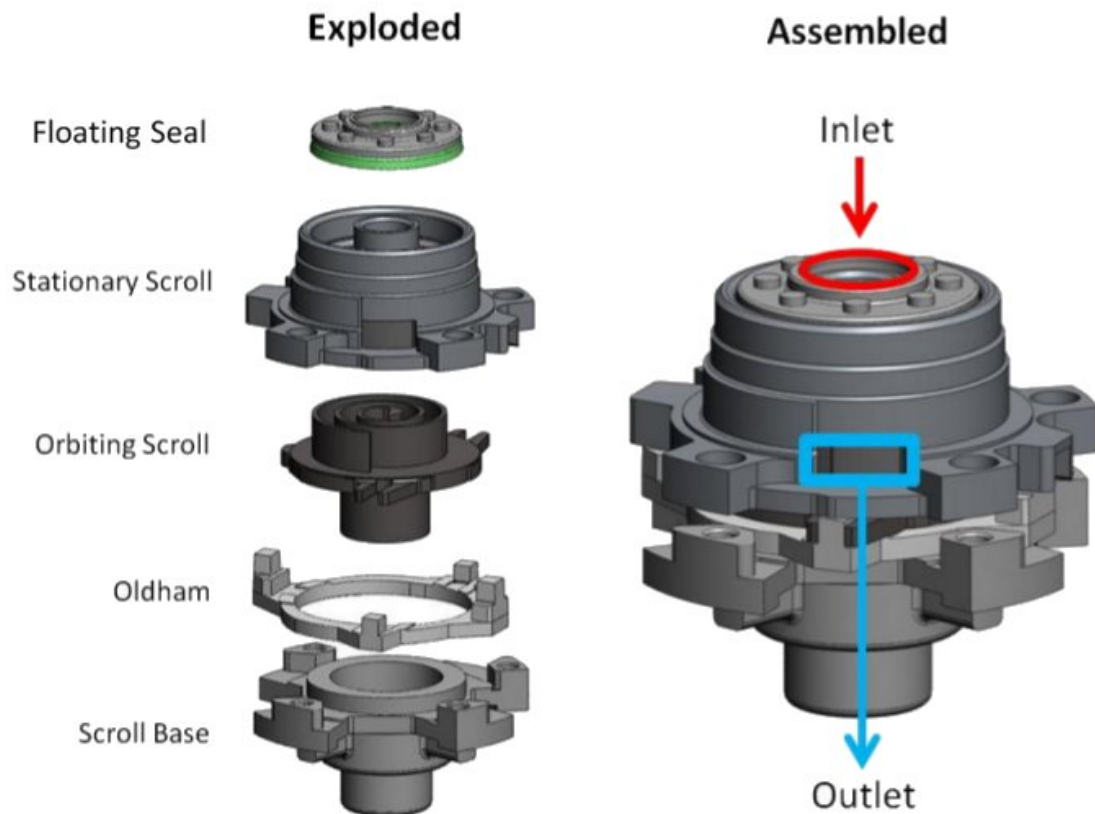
Exploded and assembled view of the scroll elements (Adapted from Harada, 2010)
